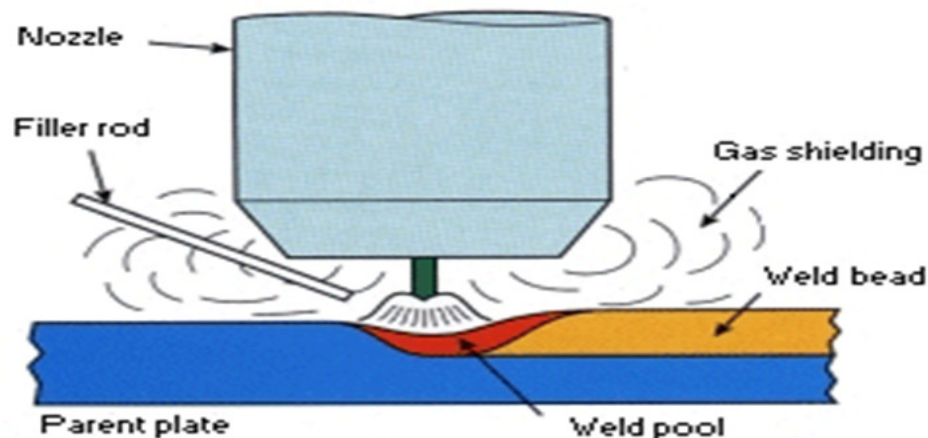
Representing the TIG welding process [Twi-Global].
